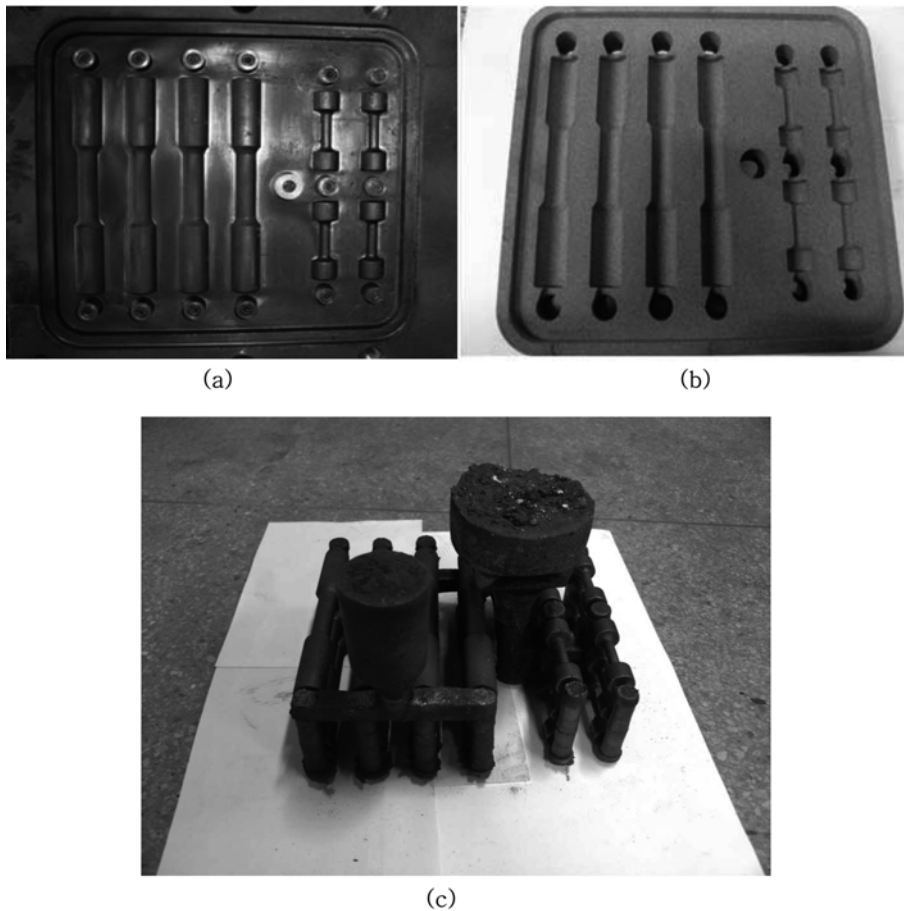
Metal mold, (a), to produce plate for shell stack mold, (b), and test casting obtained after shake out, (c).
